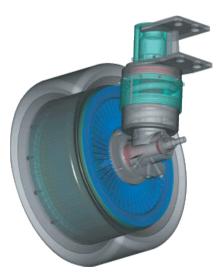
Wheel motor design - assembled unit, (e-Traction 2010)
